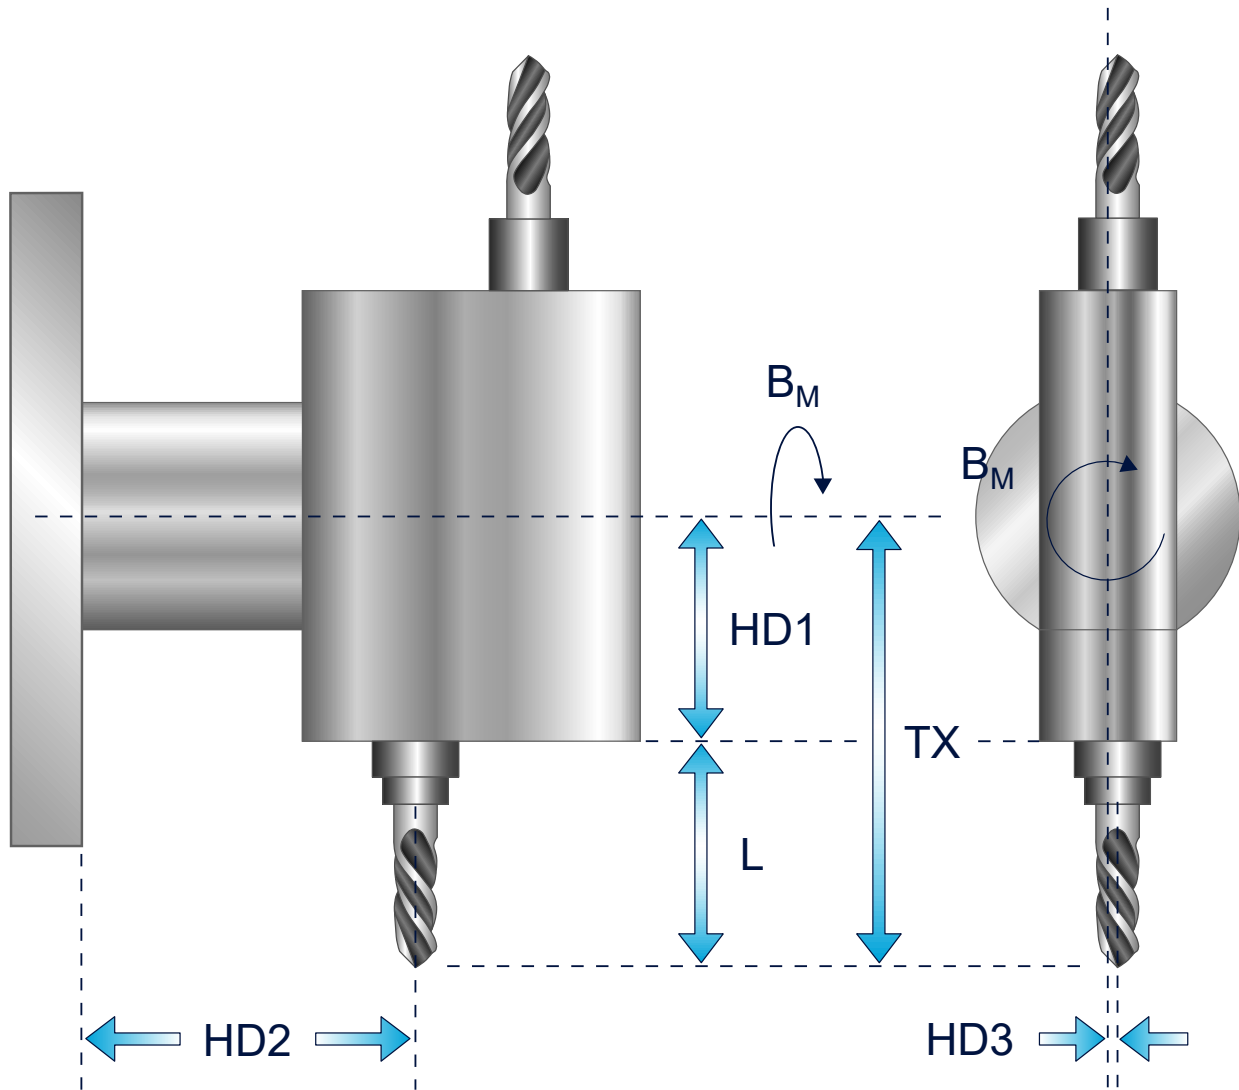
Side view and front view of the double spindle head (bottom spindle)
